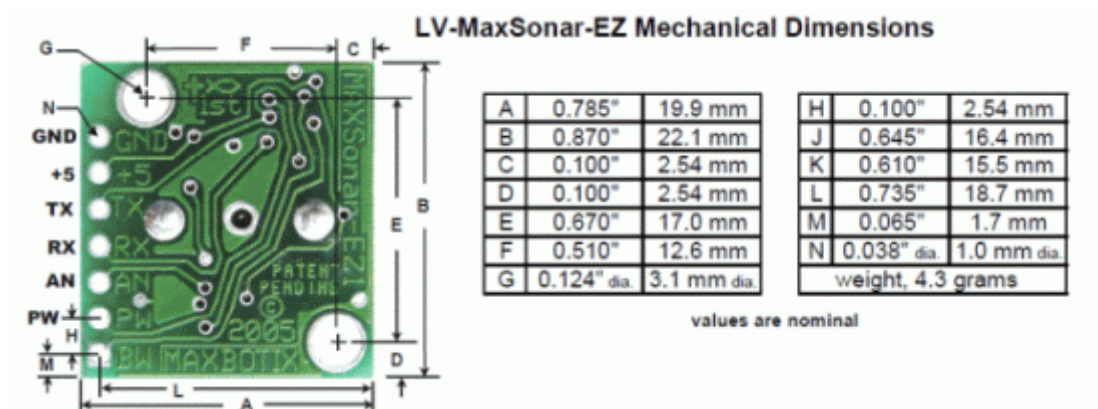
Mechanical dimensions of the MaxSonar-EZ Sensor. (Pending permission)
